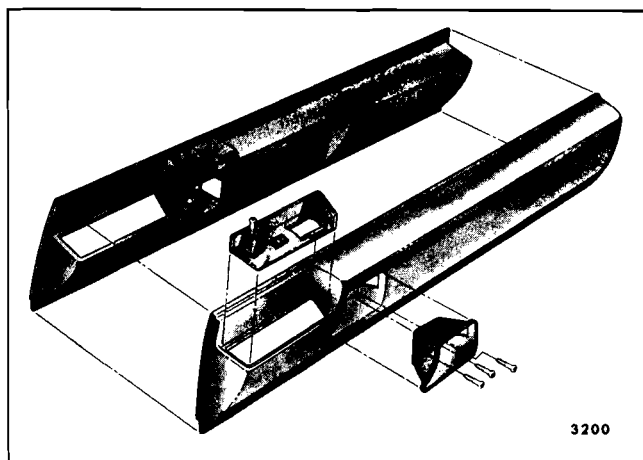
Door Arm Rest - "E" Style Shown, Cadillac "C" Styles Typical
